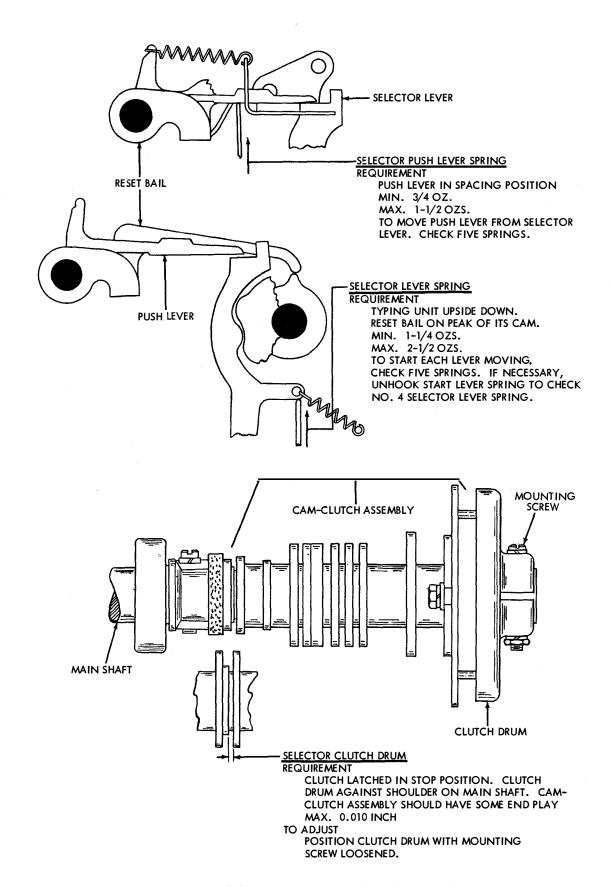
TYPING UNIT, SELECTOR CAM CLUTCH
